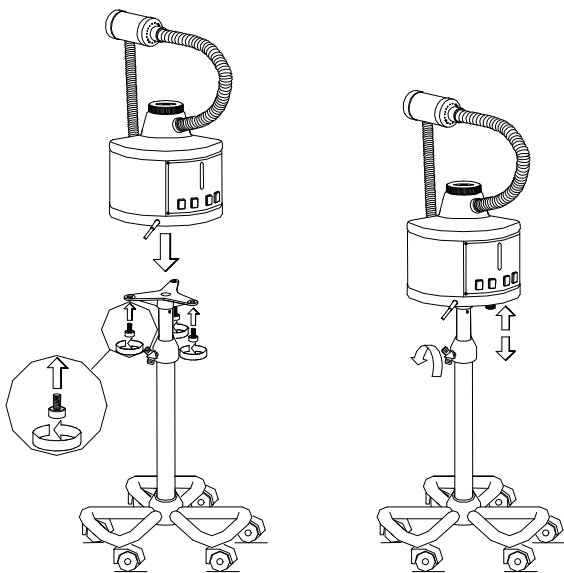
Assembly of the equipment onto the stand, and stand height adjustment
